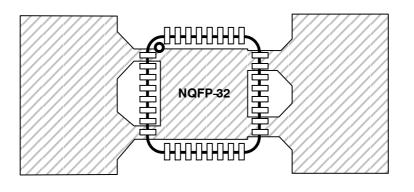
Example of NQFP-32 PCB Ground Plane Layout in Top View (Preferred Layout at Top and Bottom)
